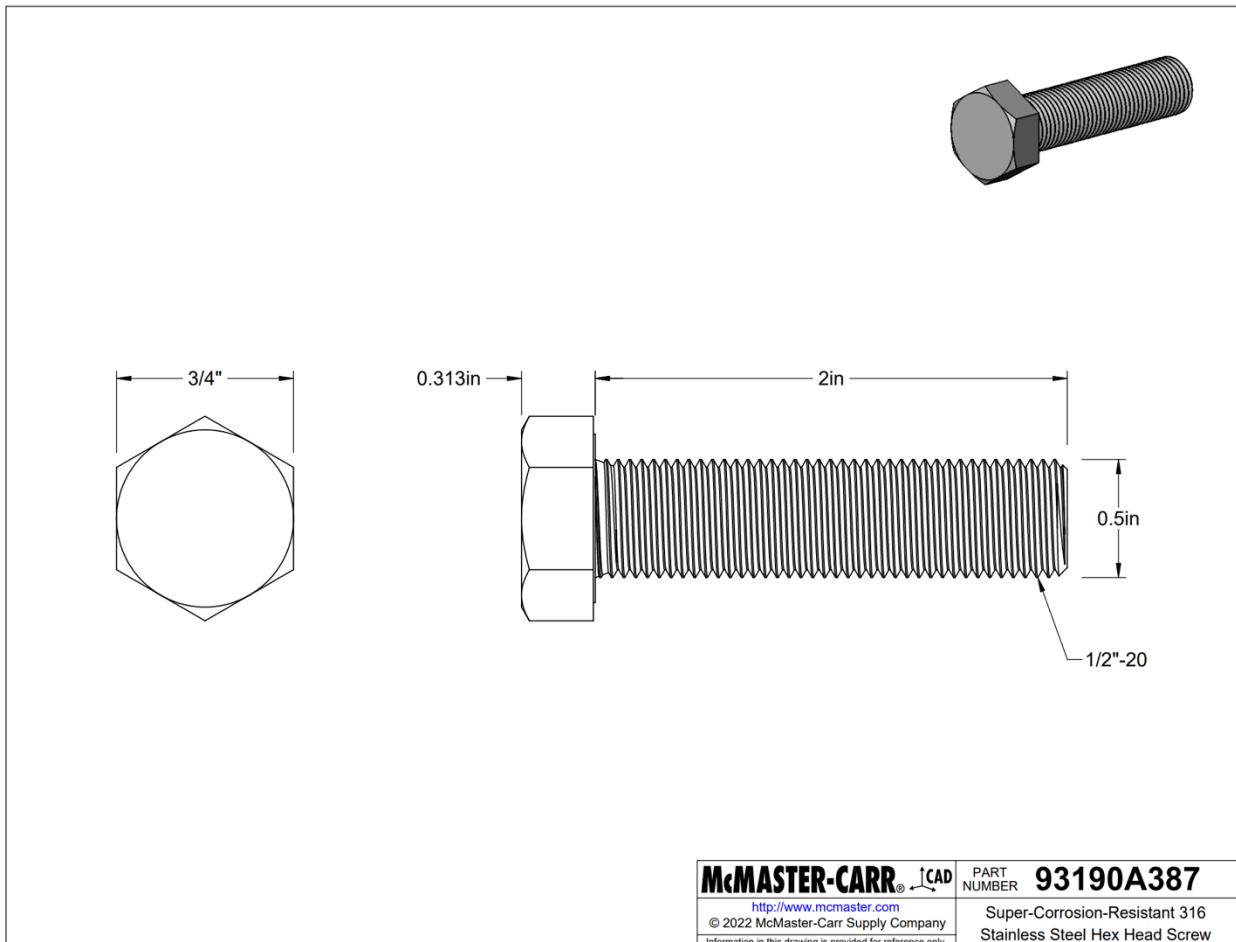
2D CAD drawing of the 93190A387 Screw
